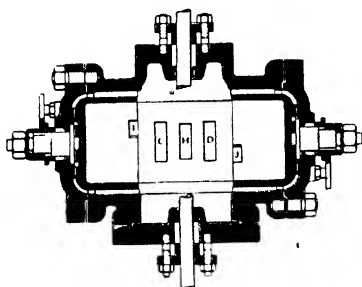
SECTIONAL FRONT ELEVATION OF VALVE CHEST
